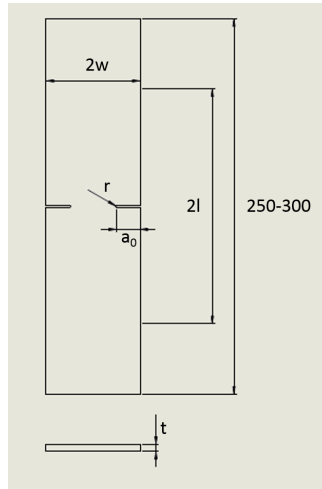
Geometric representation of the Double-Edge Cracked specimen used for tensile tests.
